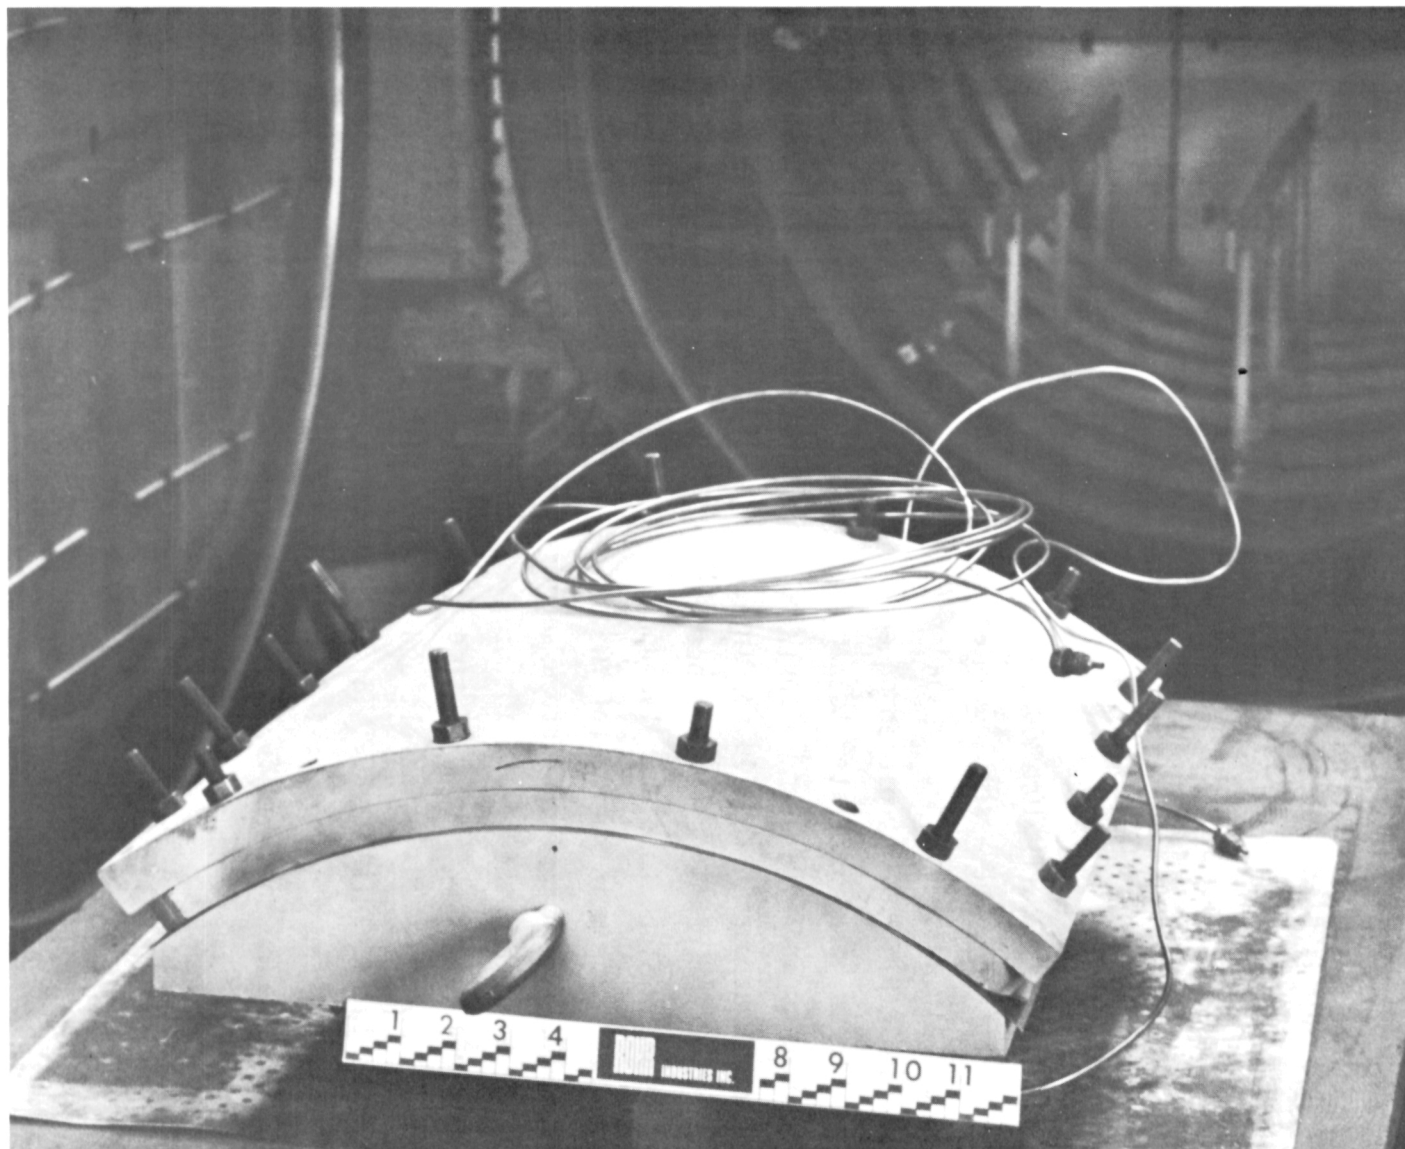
Tool for Superplastically Forming Skins Ready for Loading into Vacuum Furnace
